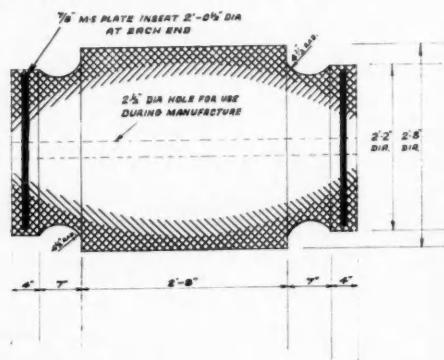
Detail of rubber blocks manufactured by Leyland & Birmingham Rubber Co. Ltd., for use at Mashur Oil Terminal.
